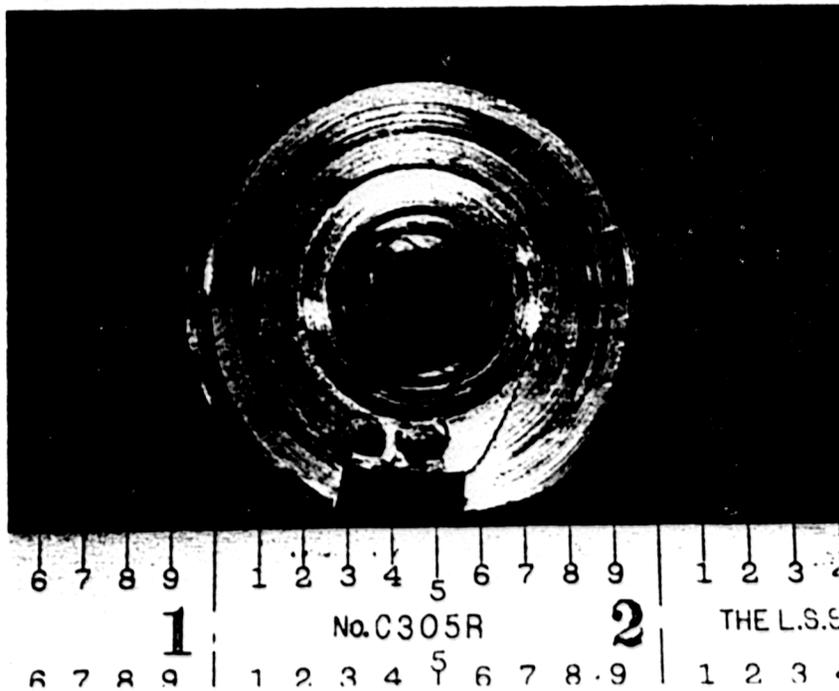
End view of shaft showing cracks which initiated at the corners of the keyway.
